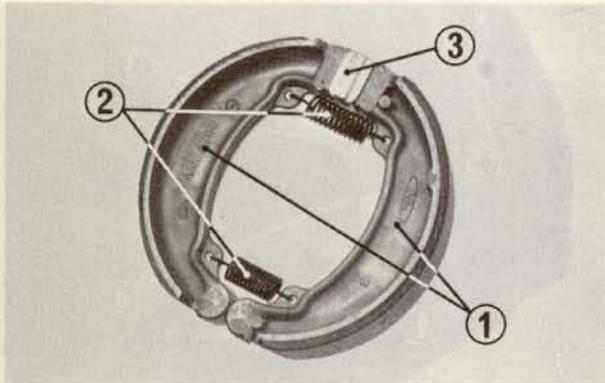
(1) Brake shoes (2) Brake shoe springs (3) Brake camshaft
